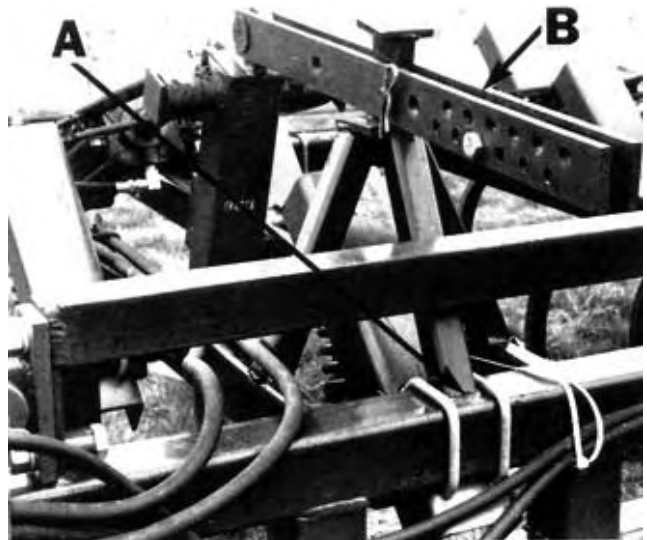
Weld Failure on Depth Control Upright: (A) Weld Failure, (B) Depth Control Bars.
